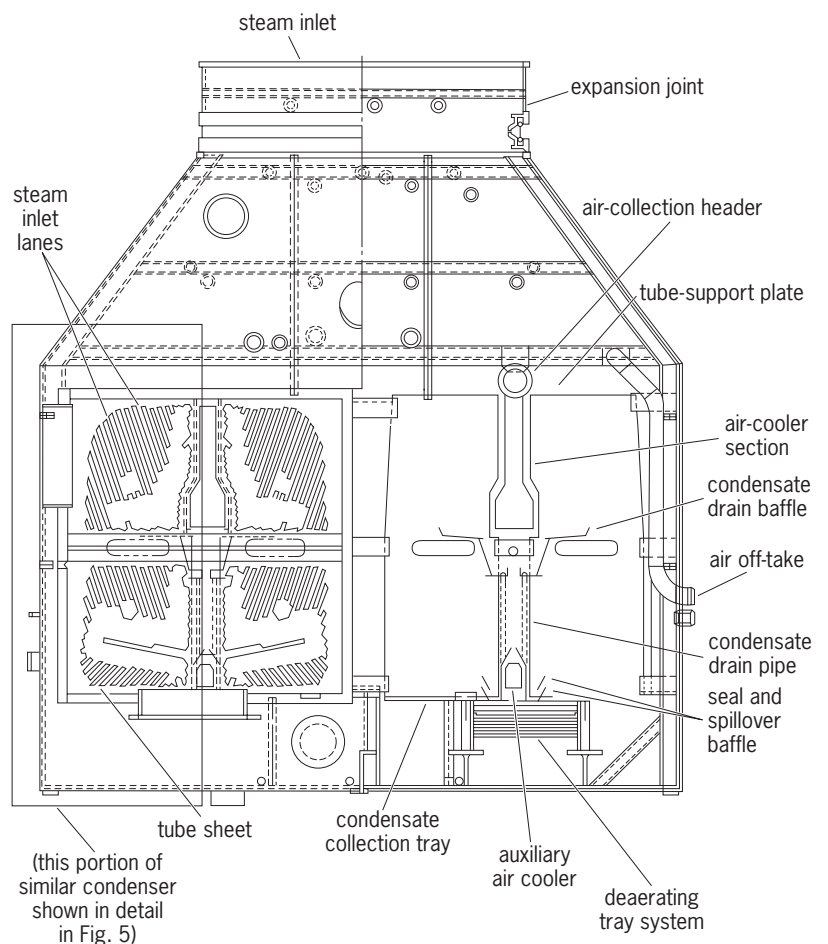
Cutaway end view of steam surface condenser. (Worthington Corp.)
